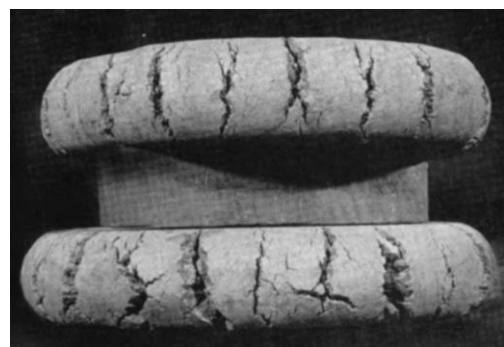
Hot cracking in a high-carbon and chromium steel after hot forging.
